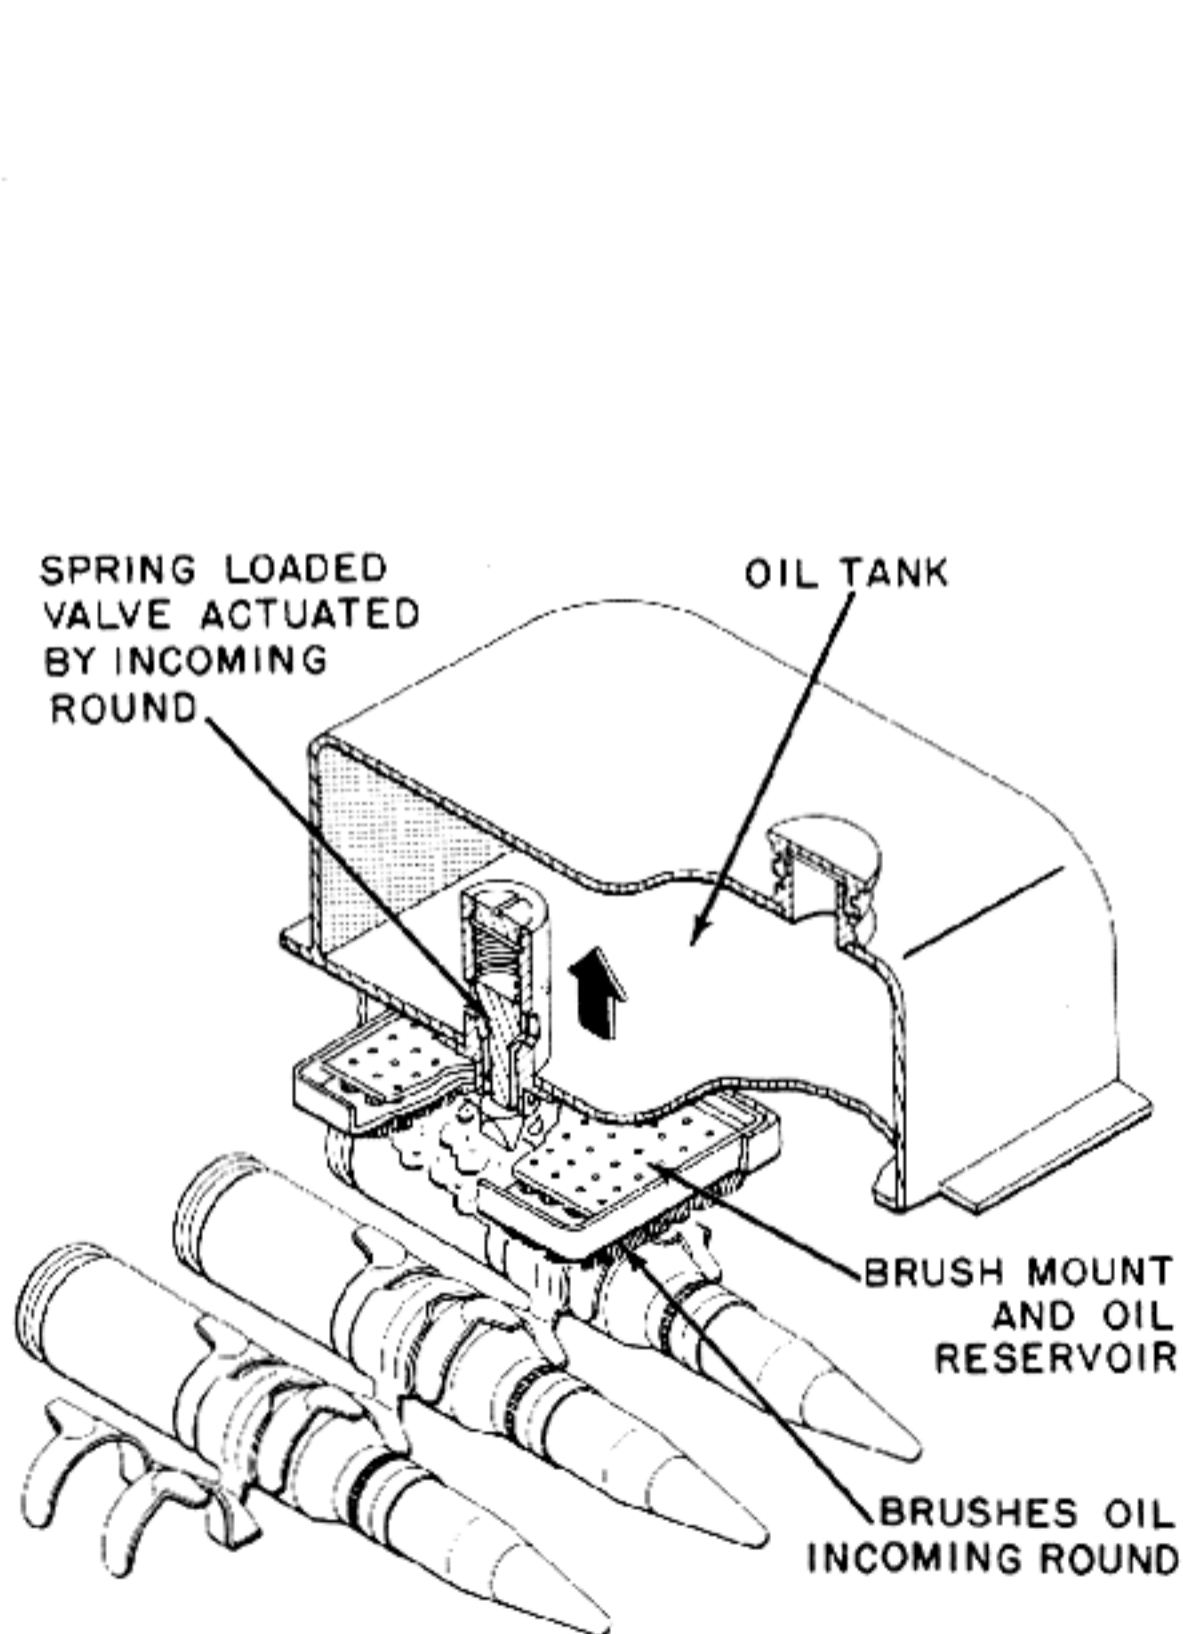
Oiler Valve Actuated by Movement of Cartridges Through Feedway, Wetting the Wiper Brushes.
